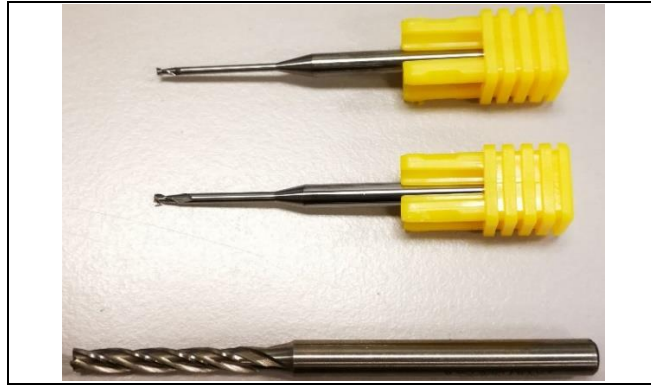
The 1.5 mm, 2 mm and 4 mm End Mills From Top To Bottom.
